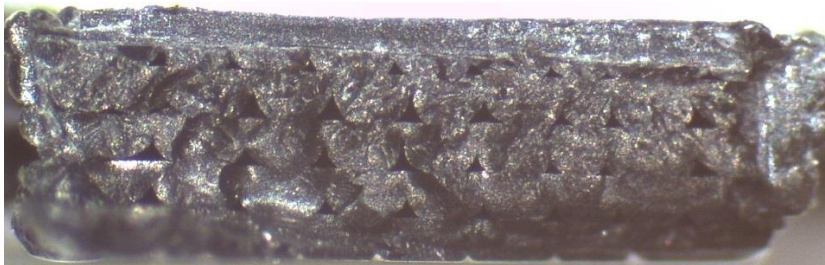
Fracture surface of a sample printed with 0.8 mm nozzle diameter and 0.35 mm line width
